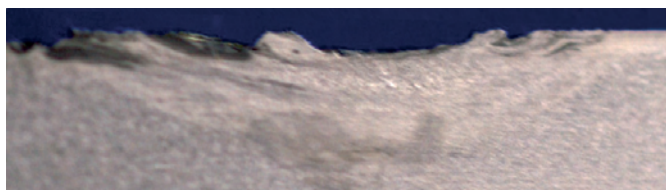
Macroscopic aspect of FSW butt welded joint, with smooth cylindrical pin
